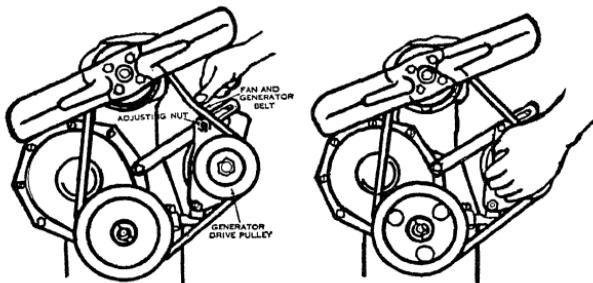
Adjusting the Chevrolet "Six" Fan Belt by Moving Generator Outward
